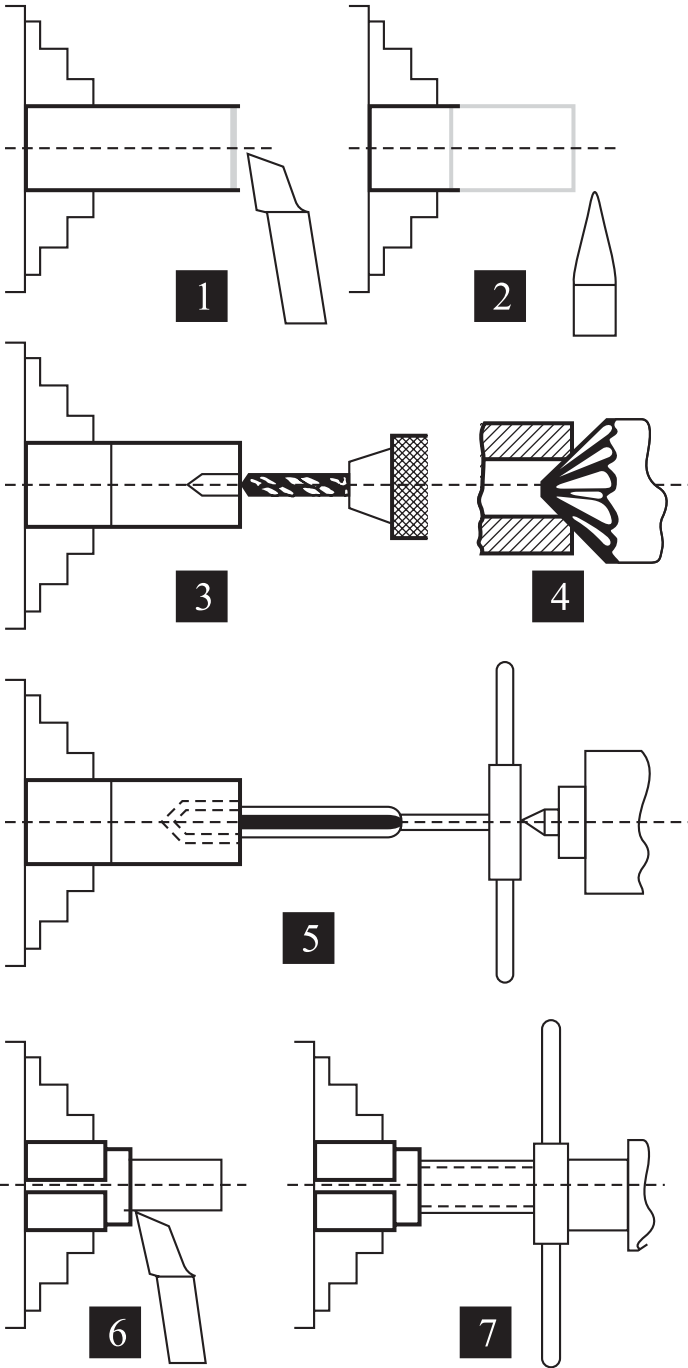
Set up sketch for each operation for manufacturing of Axle.
